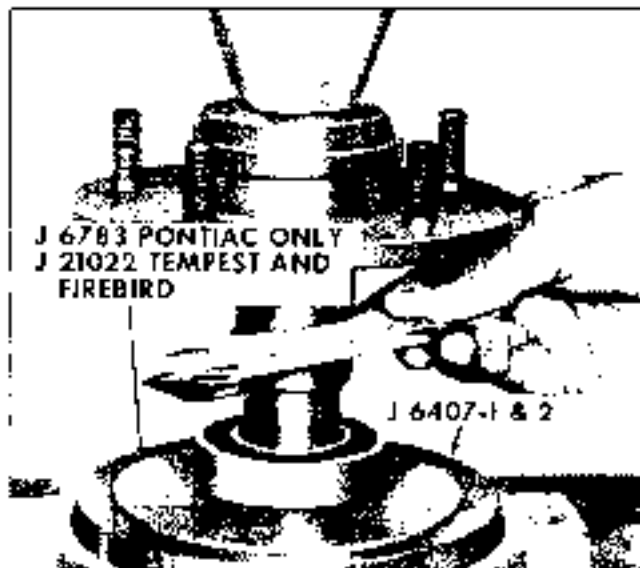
A-11 Installing Axle Shaft Bearing (Typical)
